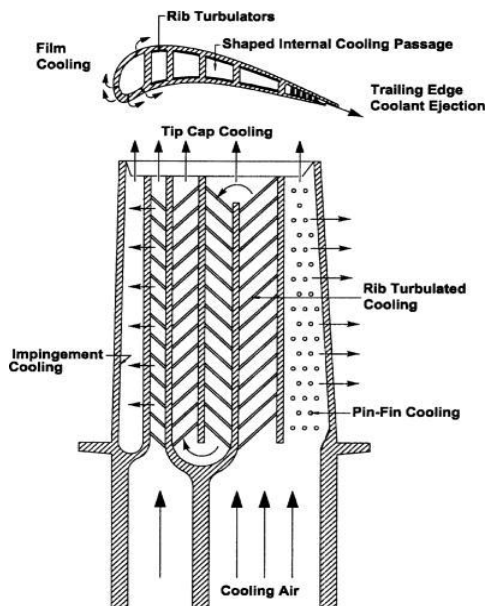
Typical Cooling Arrangement in Turbine Blade [5]
